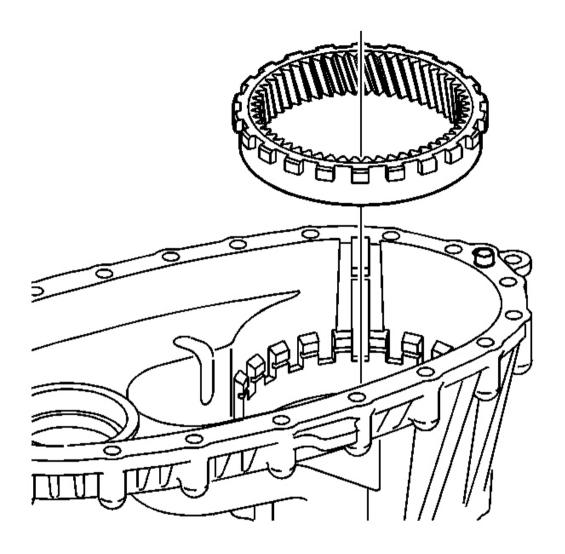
Annulus Gear & Front Case Half Courtesy of GENERAL MOTORS CORP.
